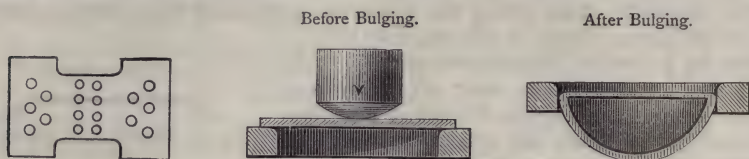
Specimen Plate to test Effect of Drilling and Punching.
